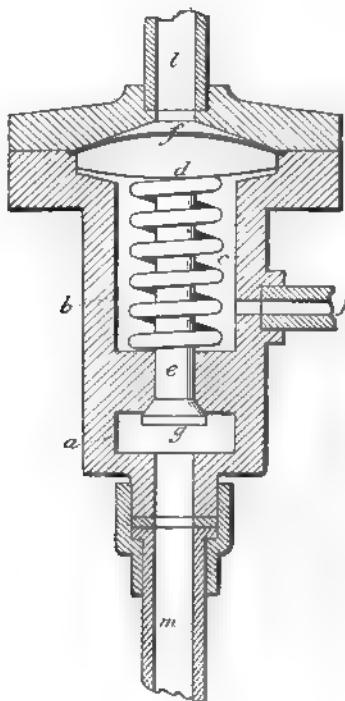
Section of the Automatic Boiler Feed Regulator of the White Steam Carriage.
